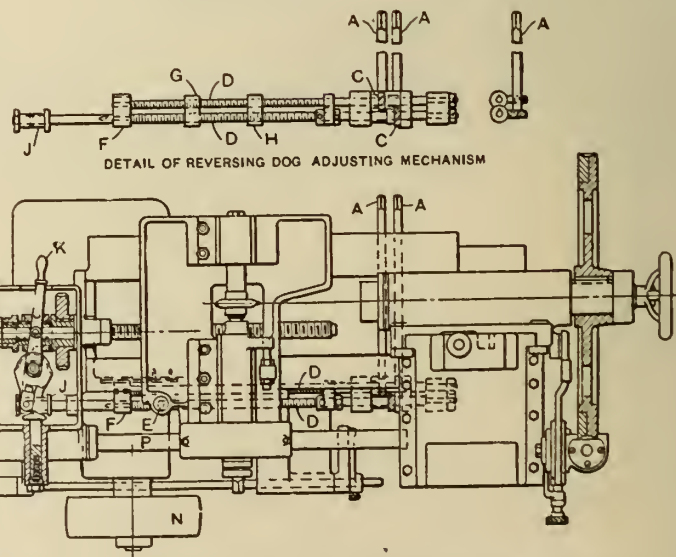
Plan of Gear Cutter, With Detail of Stop Adjusting Mechanism.
